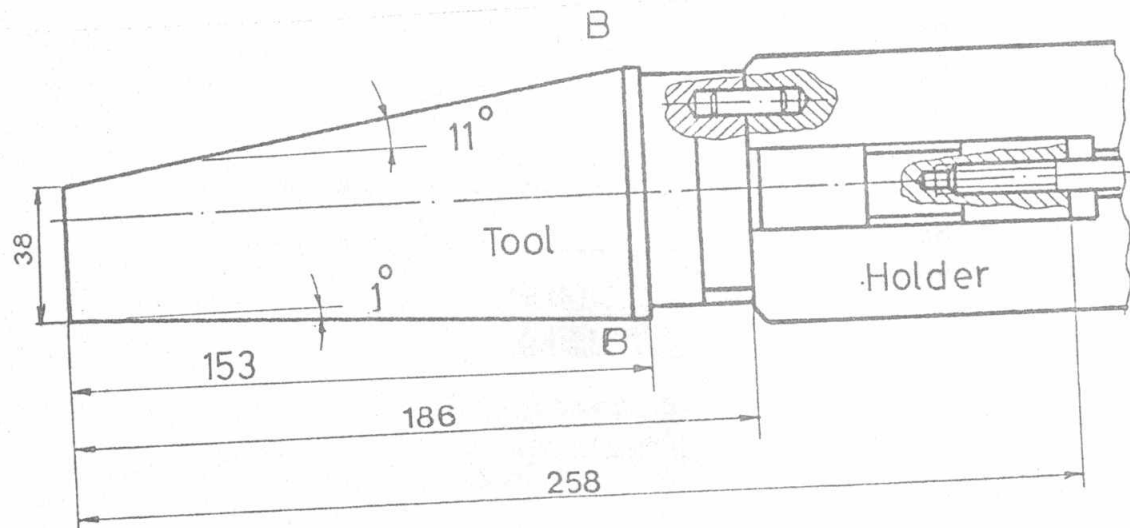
Tool and Tool Holder used for broaching airfoil slot
